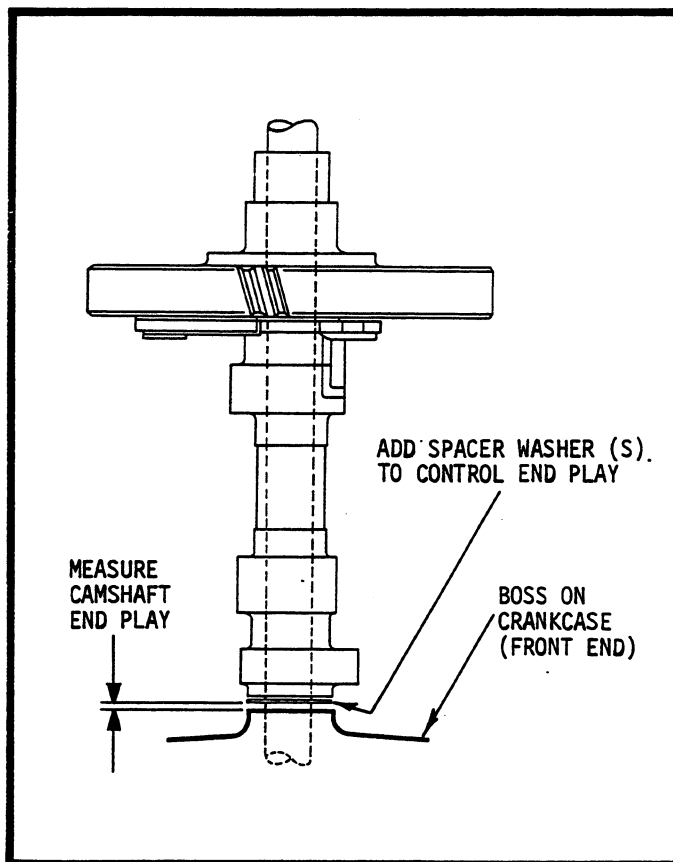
CAMSHAFT END PLAY ADJUSTMENT
